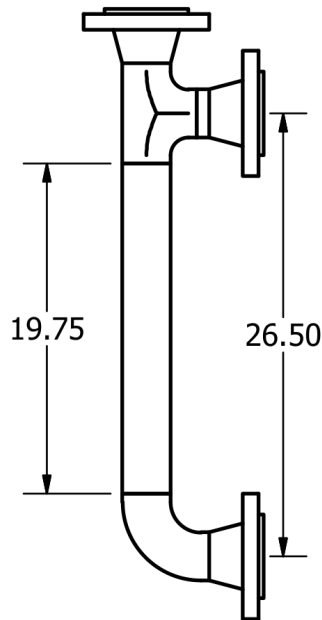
CAD drawing for the heater mounding jacket. The heater screws is mounted at top via threaded blind flange. Units in inches.
